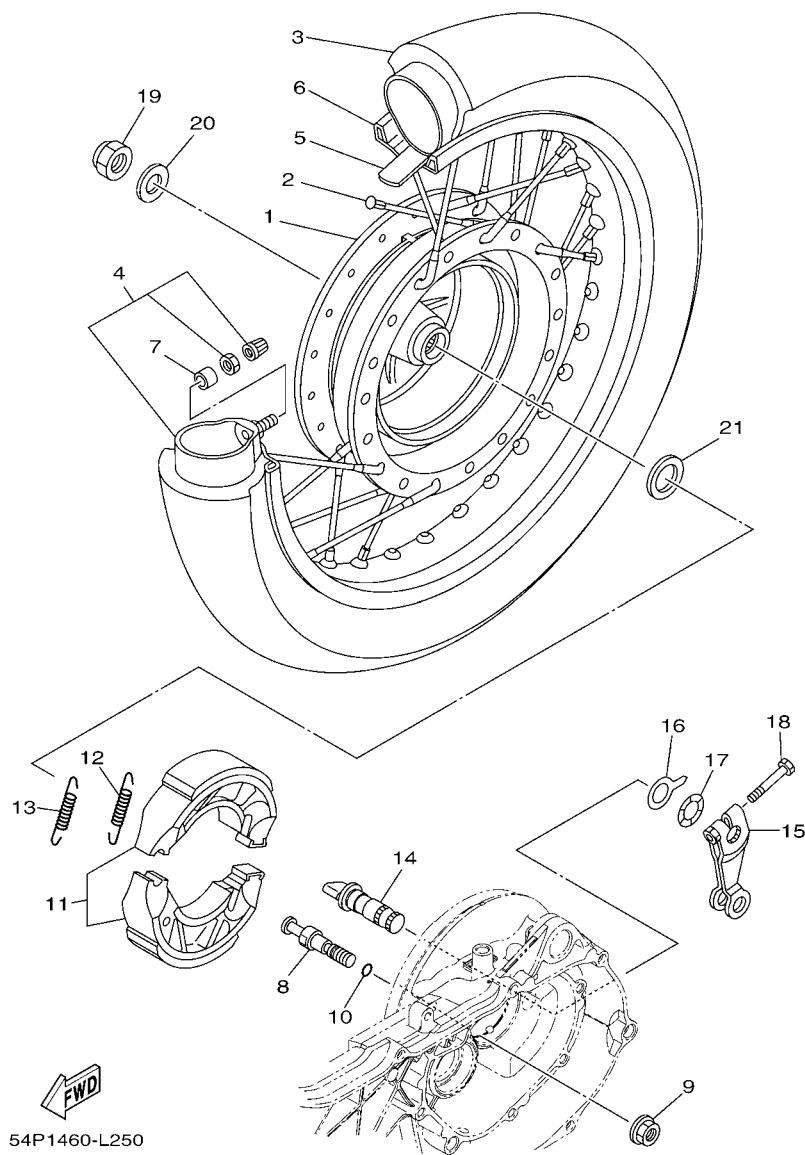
REAR WHEEL FOR SPOKE WHEEL
